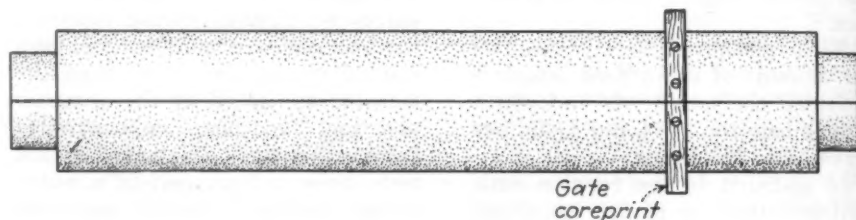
A standard type of split roll pattern, with gate core print in position.
